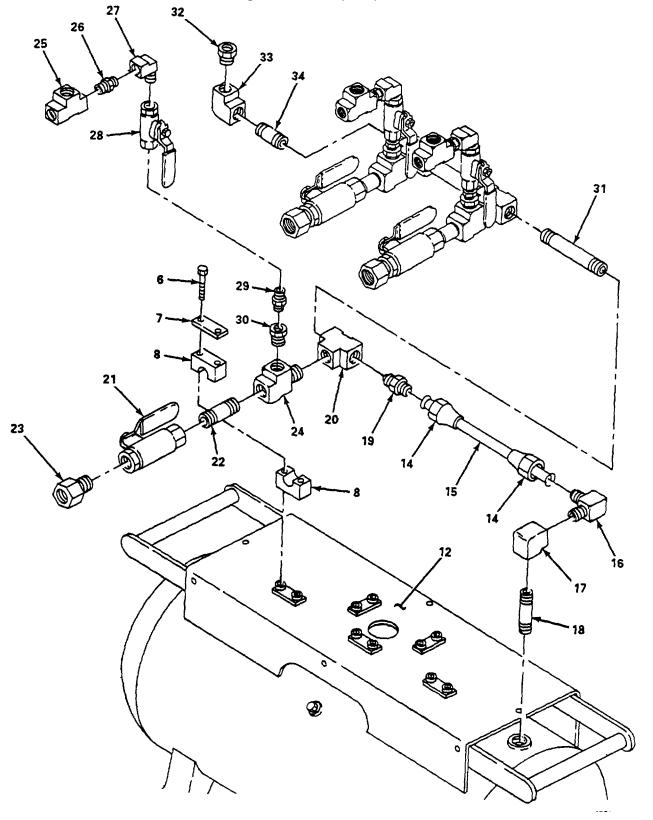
Fittings and Valves, Removal (Sheet 2 of 2).
